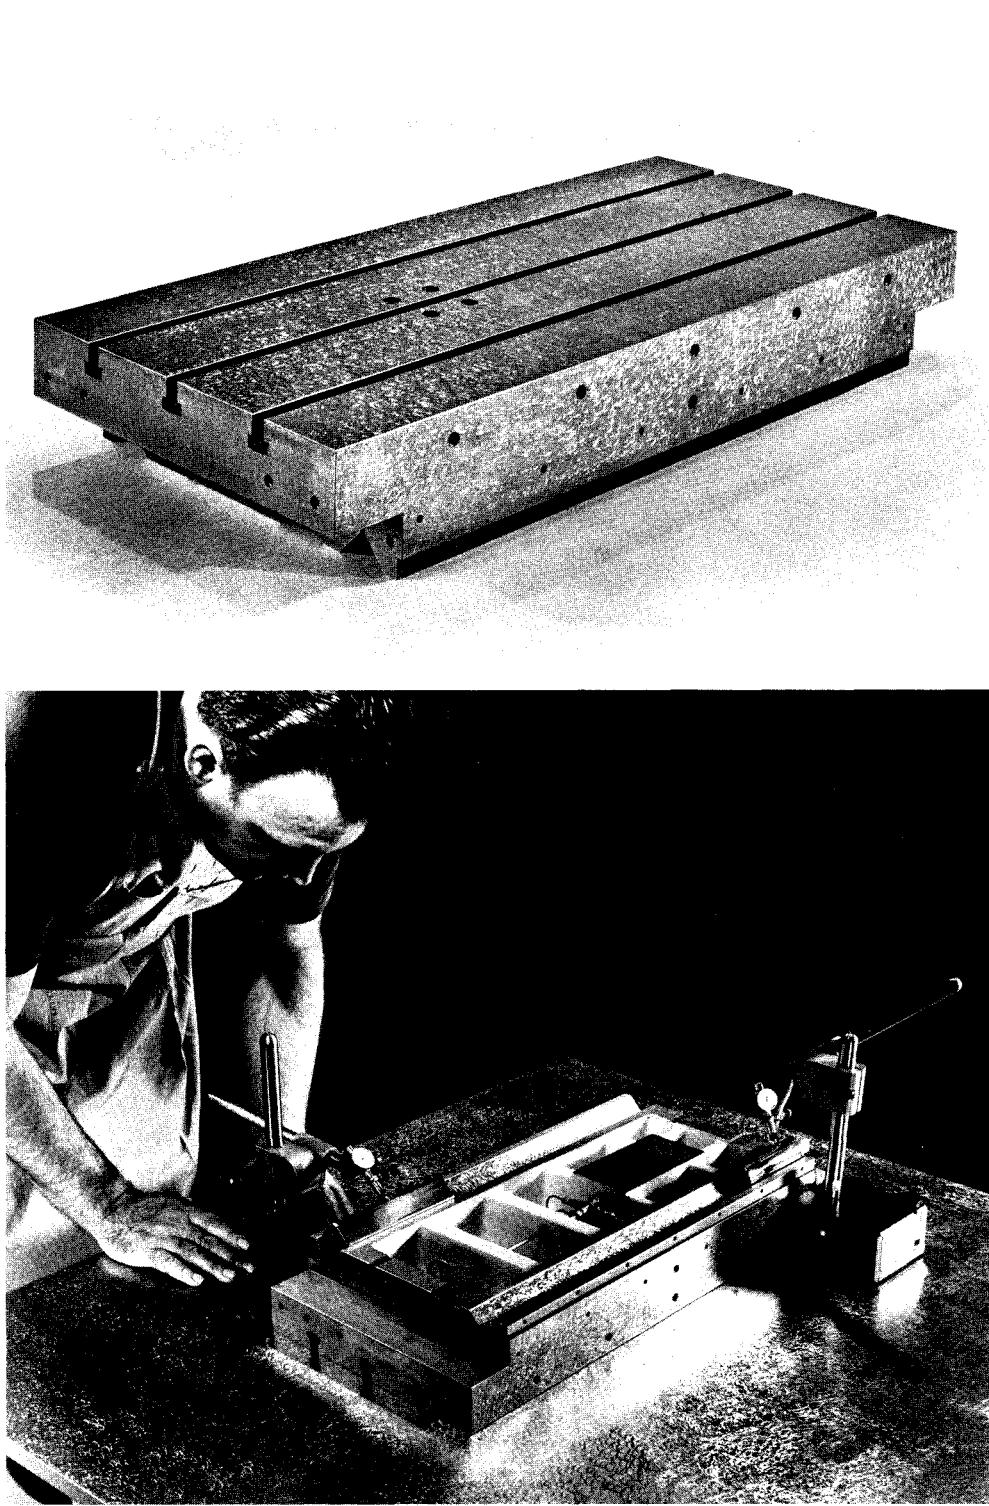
While the table is resting on the surface plate, the parallelism of its V's to its top is inspected, as is the parallelism of the V's to its sides using an indicator and stand with a knife edge (far right).
